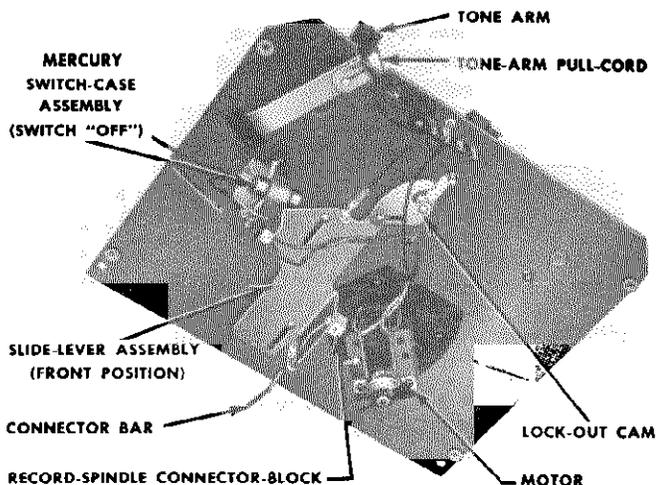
BOTTOM VIEW, COMPONENTS IN OPEN-DOOR POSITIONS, WITHOUT RECORD.
